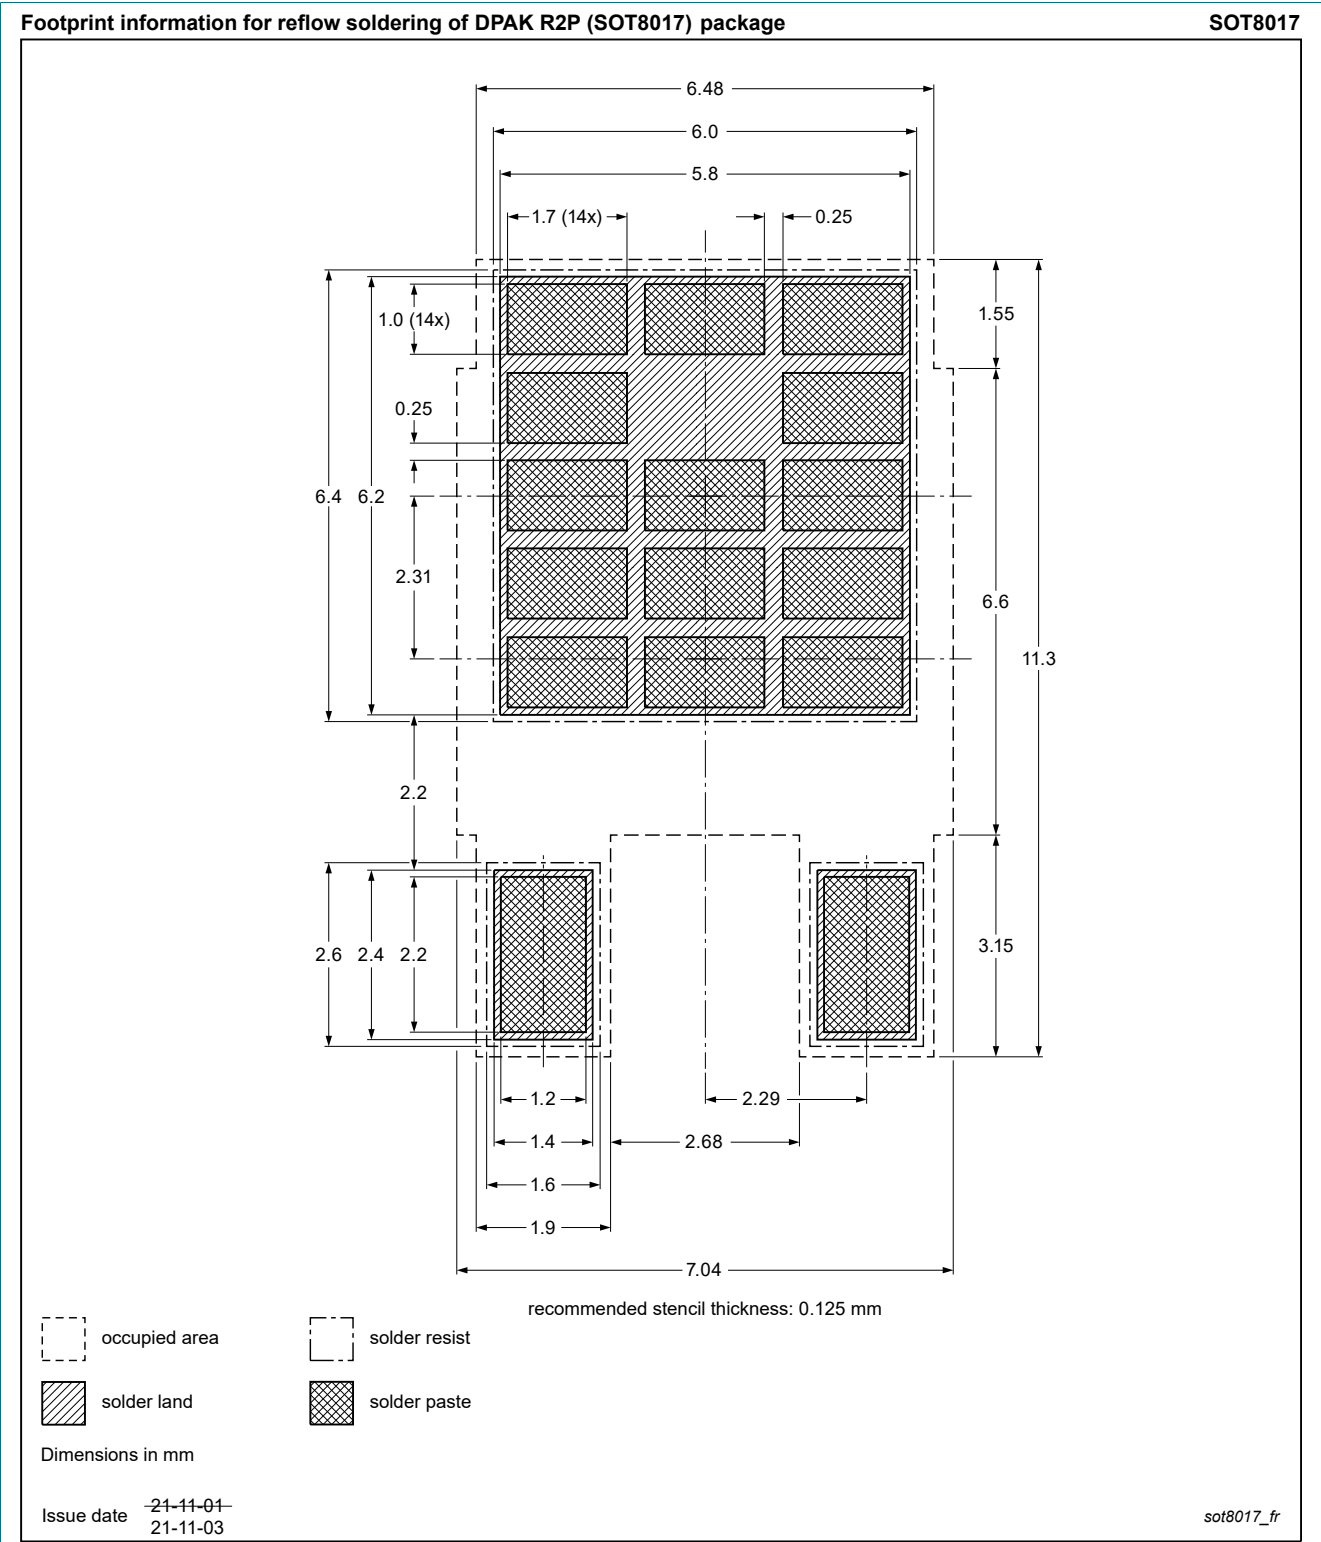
Reflow soldering footprint for DPAK R2P (SOT8017)
